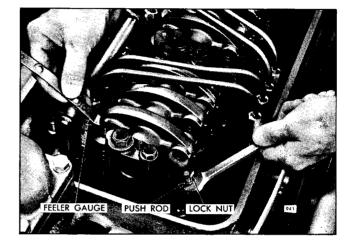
Adjusting Valve Clearance– Two Valve Cylinder Head
